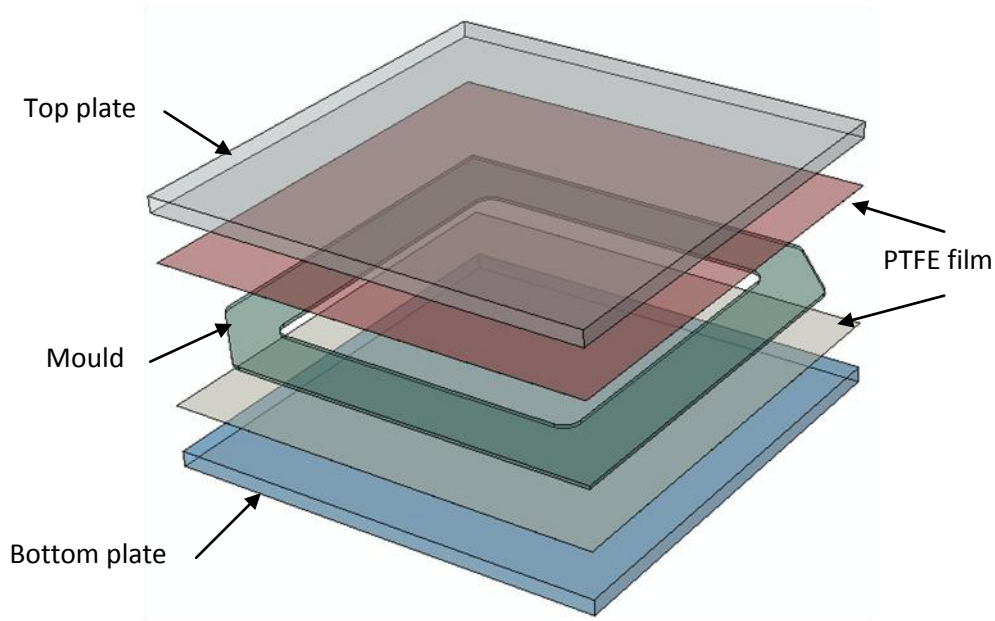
Mould setup used for curing the bulk adhesive sheets.
